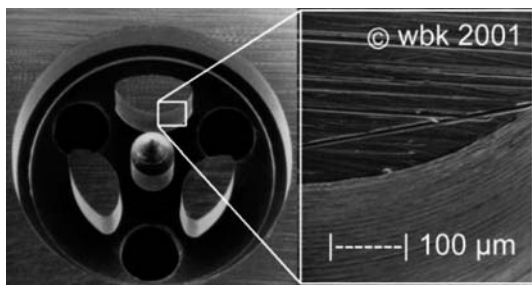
Steel mold cavity (52 HRC) for wheel of model car (l.) and detail of milled edge (r.)
